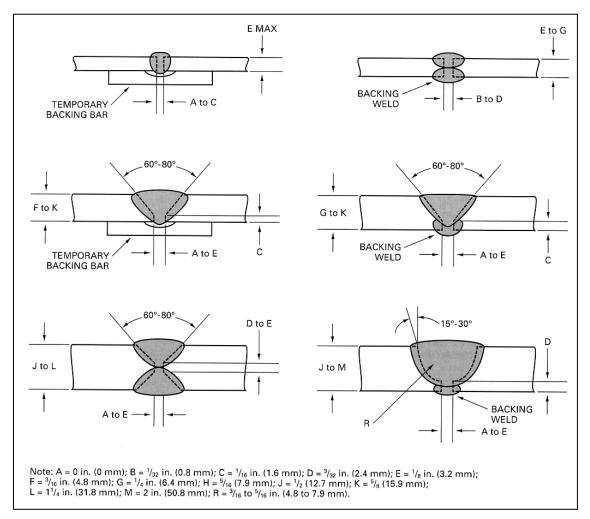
Suggested designs for arc-welded butt joints in nickel and nickel alloys [Ref. 2]
